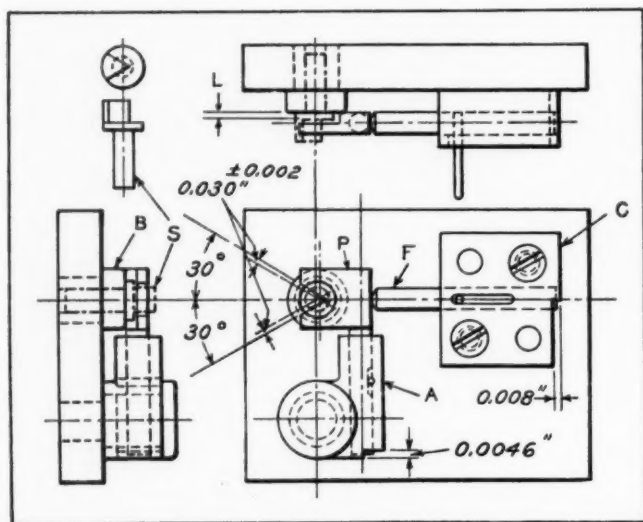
Gage for Inspecting Angular Faces on Stud S
